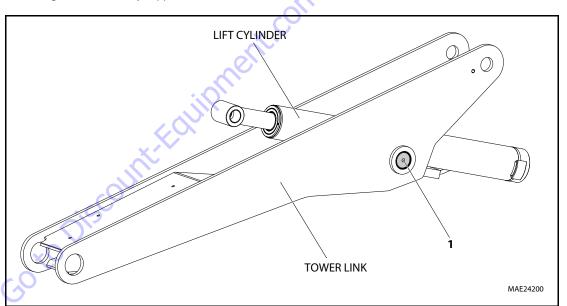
Main Boom Lift Cylinder Removal and Installation
